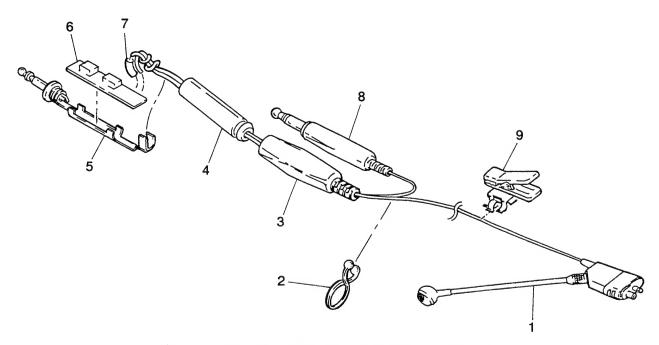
Microphone ECM-9035, ECM-9036 Exploded View
